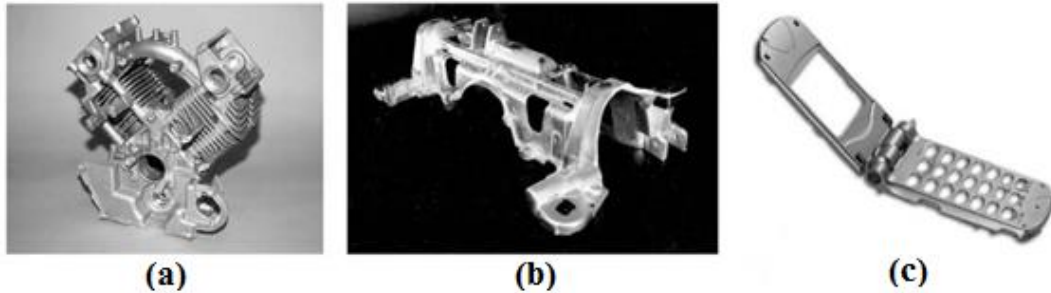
Aluminum casting alloy application. (a) Crank case for small engine, (b) Cross member for a minivan, (c) mobile case. [7]
